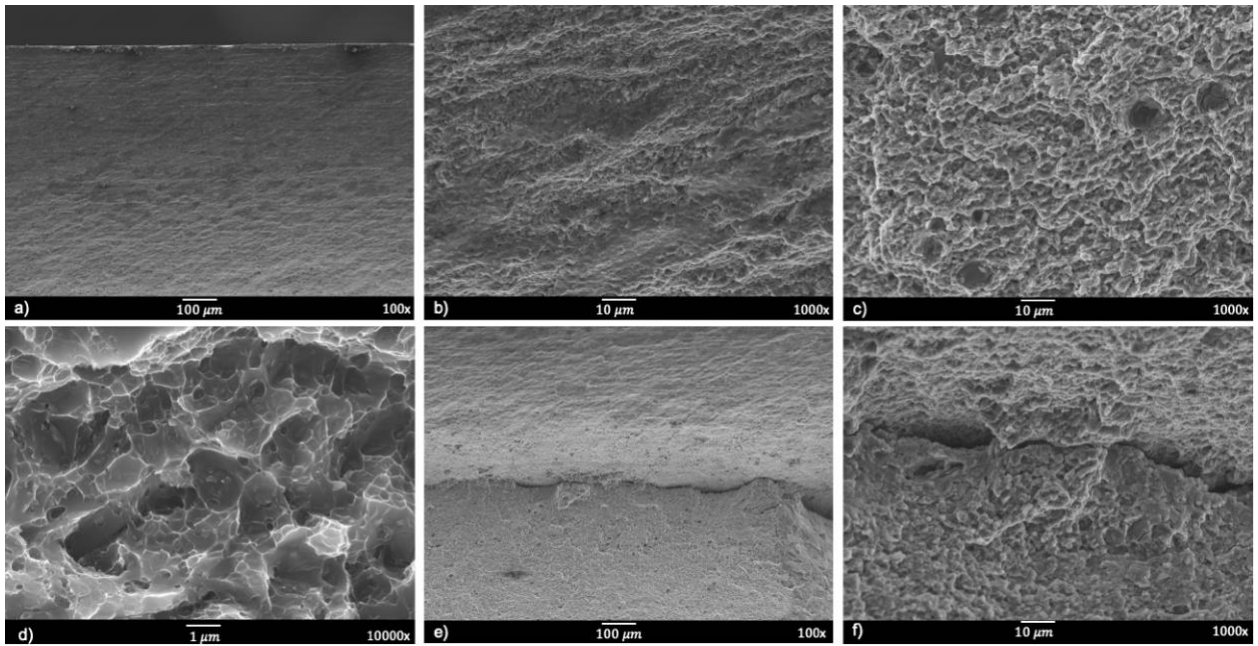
L3-5 fractographies. a) crack initiation region, b) final fracture region, c) final fracture regions showing dimples, d) detail of c), e) secondary cracking, f) detail of e).
